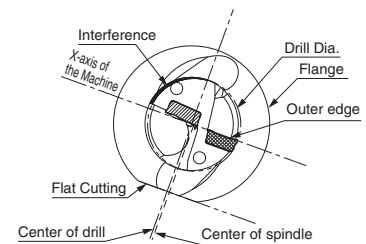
Excessive offset (For Smaller Hole Diameter)
